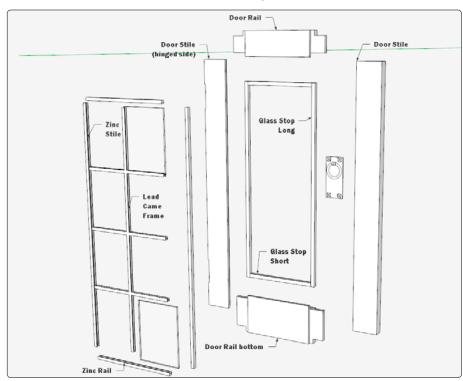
An exploded view of the door frame and the leaded-glass assembly.
